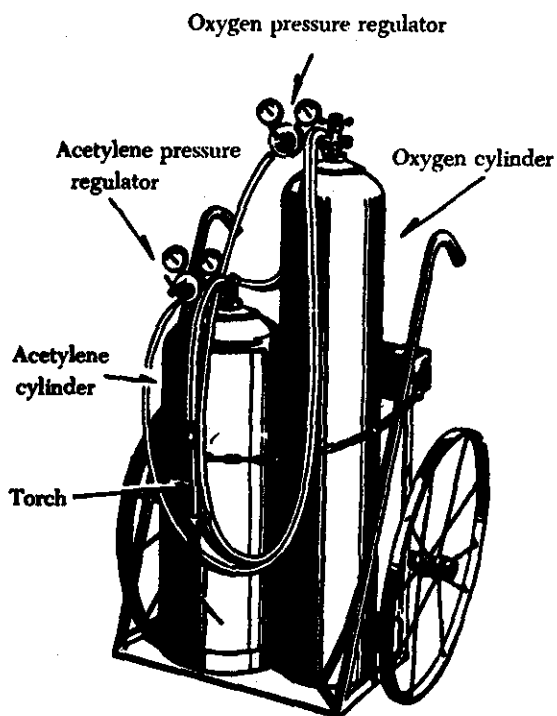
Typical portable acetylene welding rig.
